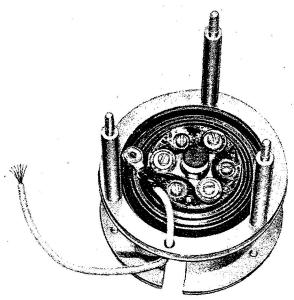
Alignment of Armature Assembly in Magnet Case
